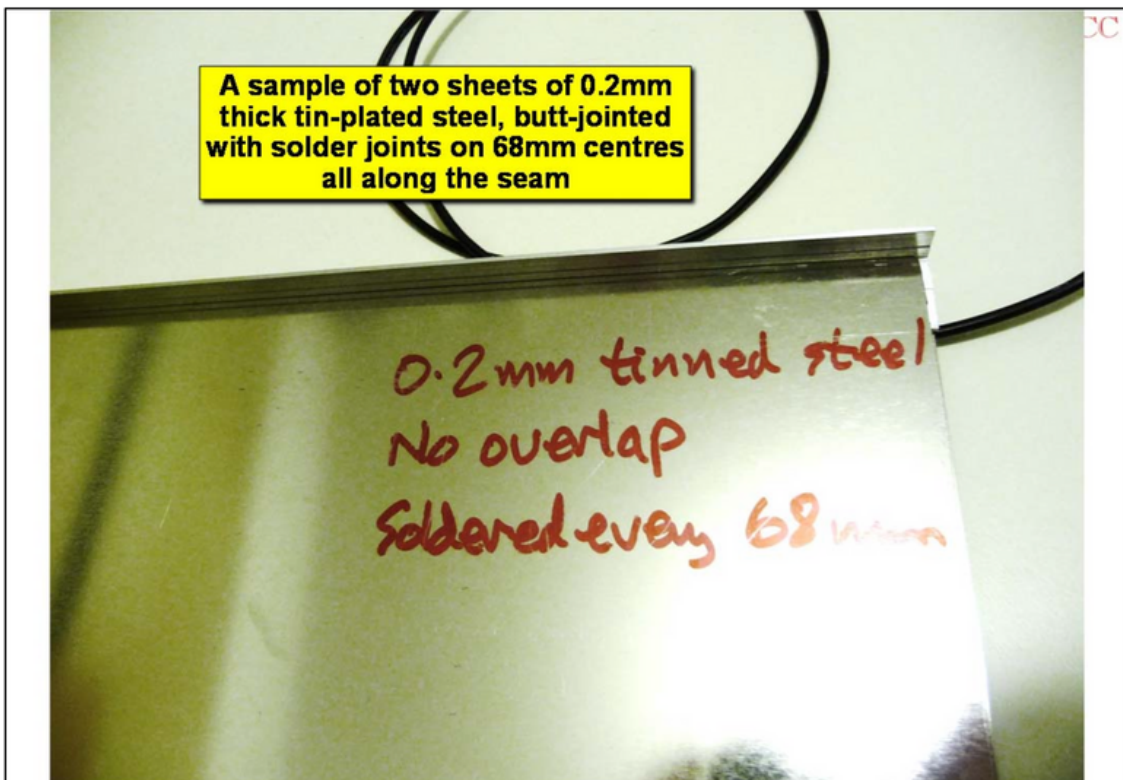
The butt-jointed tin-plated steel sheet to be tested
